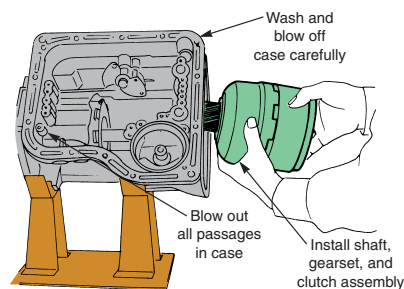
A clutch and gearset assembly is shown being installed in the transmission case. Make sure that parts are properly seated. (Nissan)
